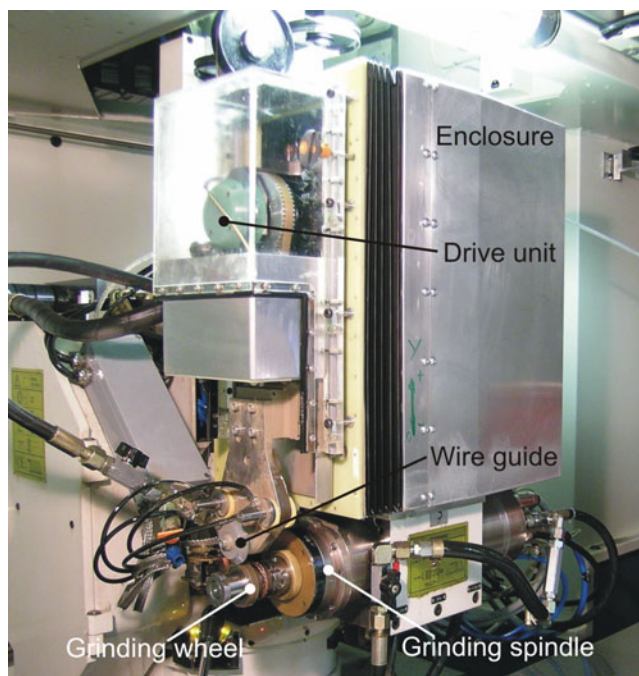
Wire electrical discharge dressing unit integrated into the grinding machine
